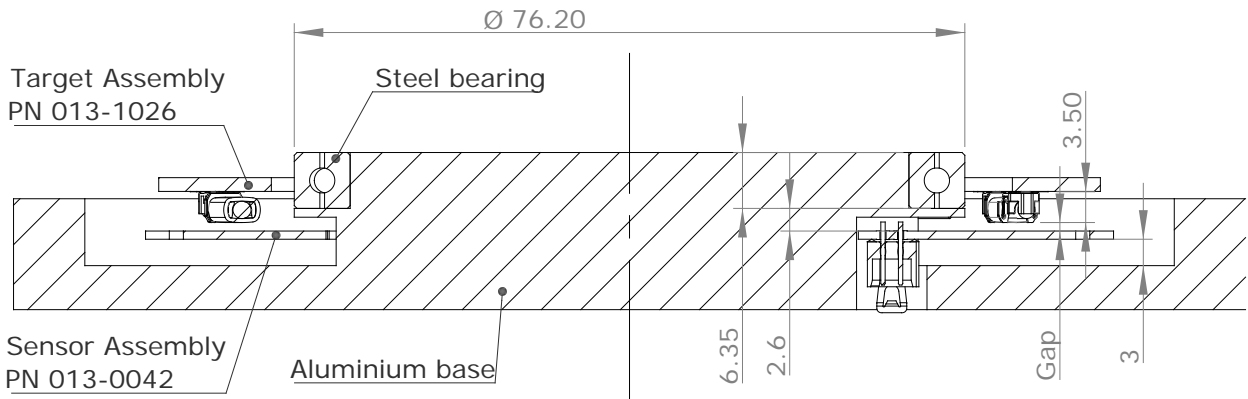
Example metal integration including aluminium behind sensor and steel bearing inside target
